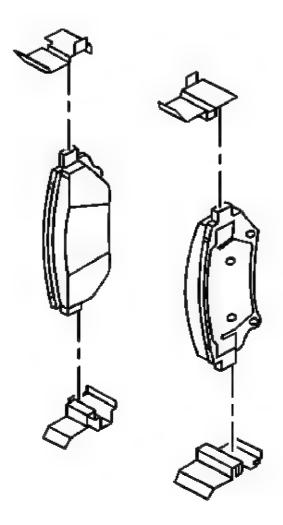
Disc Brake Pad Mounting Hardware Courtesy of GENERAL MOTORS CORP.
